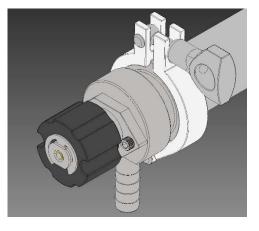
SAMPLE VALVE IN CLOSED POSITION
